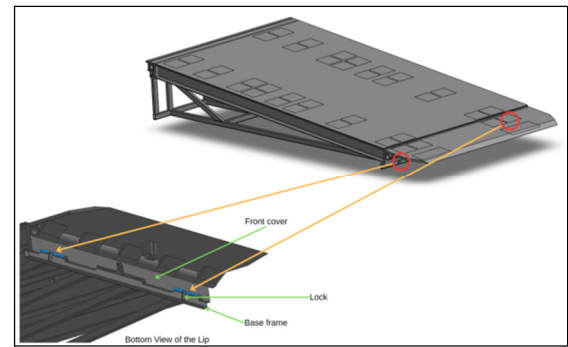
Platform at lowest elevation, showing the front cover fixed by the locks.
